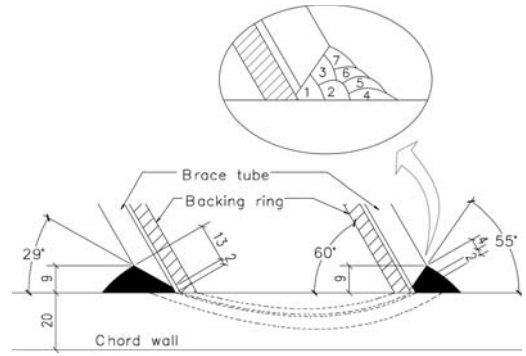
Geometry of the weld gap for the brace-to-chord connection. The detail shows the welding passes according to the welding procedure specifications.
